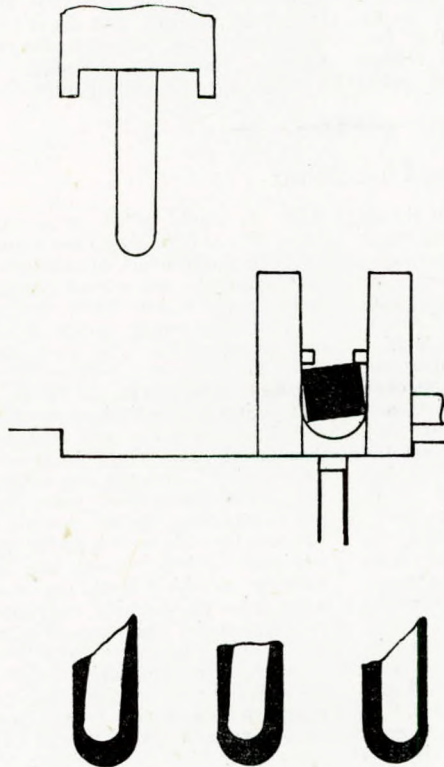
Ill-fitting billet lying askew in the bush bottom
